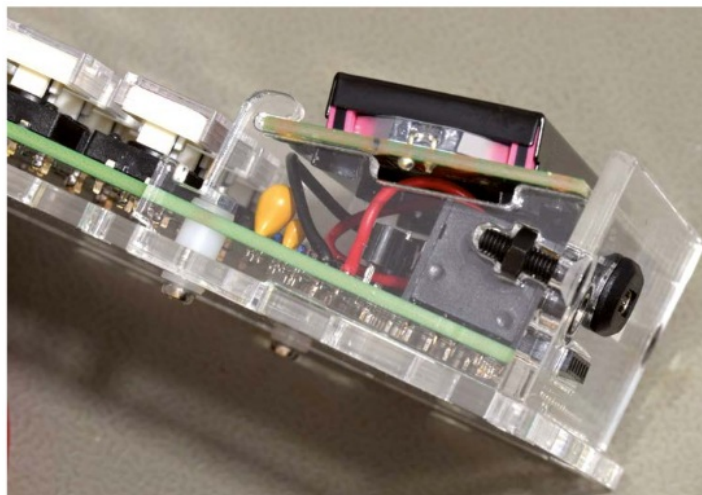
Detail of back panel, display supports with screws and M2 screw of the PCB.
